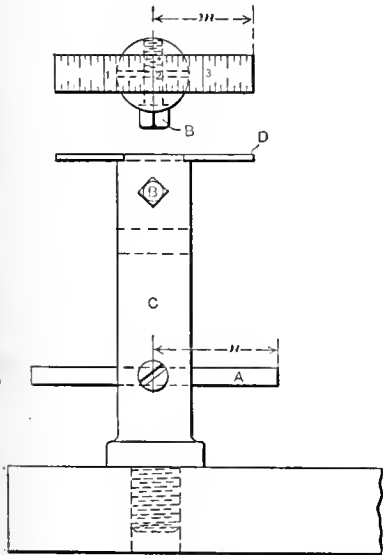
Grinding Device for Cutters, on Table of Grinder.
